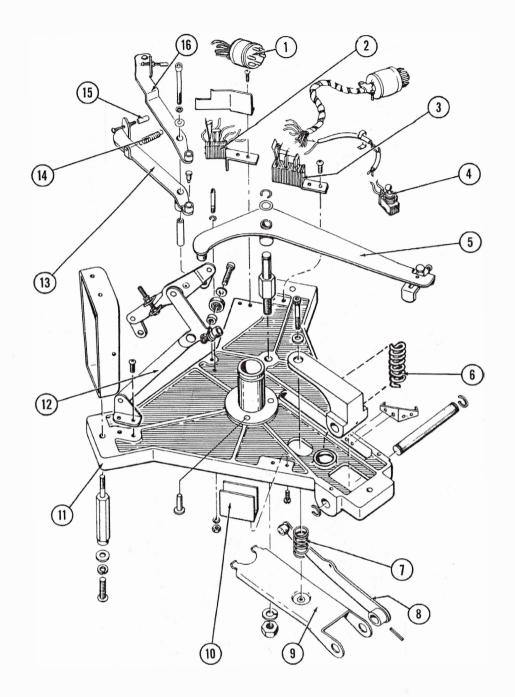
CHASSIS FRAME CASTING AND SHAFT ASSEMBLY, 2404-2404S
